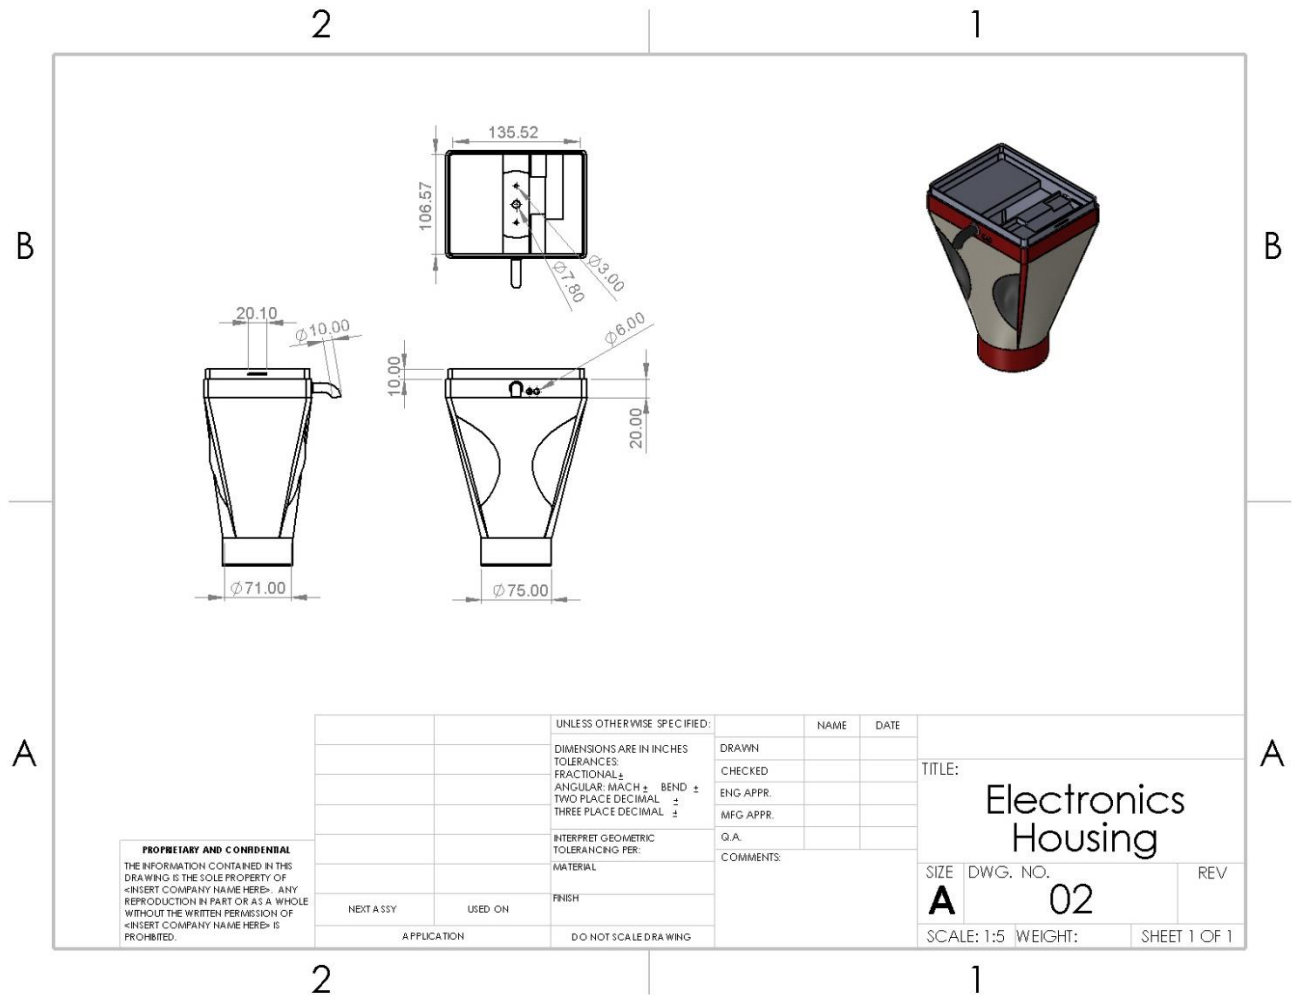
2D Sketch of Electronic Housing and Isometric View
